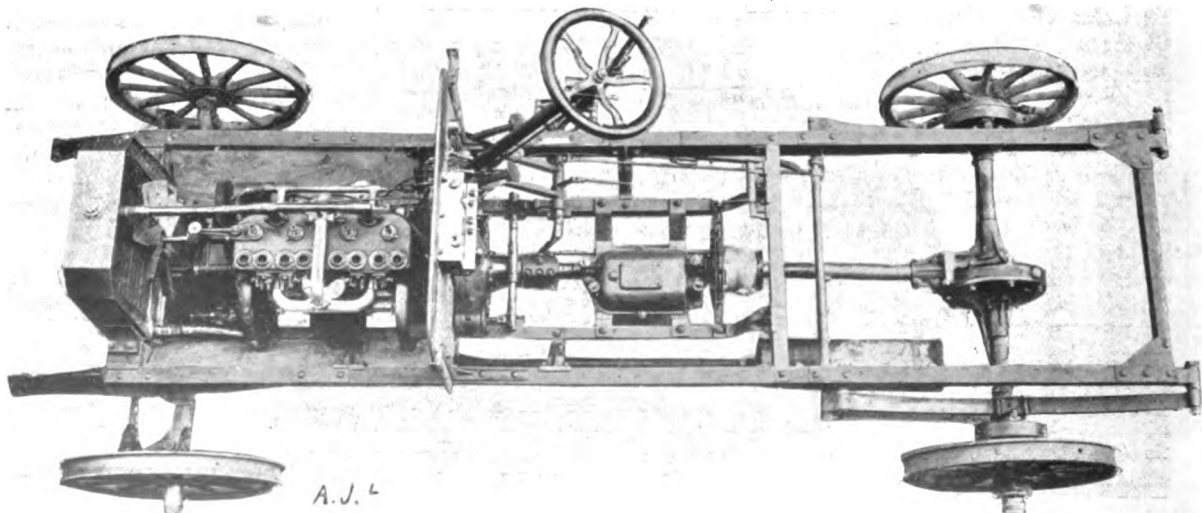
View from above of the 20-24-h.p. Simms Chassis, showing the arrangement of the underframe which supports the engine and gear-box.
